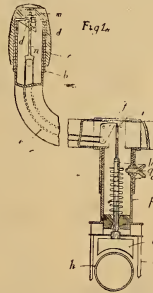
is a sectional view. A is the handle-bar upon which the sleeve b turns. Sleeve b carries the handle. The end of the handle-bar is provided with the inclined surface d, upon which the bearing pieces d, as shown inside the handle, bear. The bearing pieces are attached to the sleeve b, so that when the handle is turned by the rider the connecting piece e, which is pivoted to the lever f, will operate on the brake-block g through the medium of rod h. The rod h is dropped into plunger tube, the former being fitted with lock nuts, which can be adjusted so as to allow the handle-bar to be raised or lowered. The connecting-rod n is also made adjustable by nut m, so that all parts are adjustable. A loose cap is provided at end of handle to take off, so as to allow for adjustment. A hole is also provided at top of handle-bar to allow for manipulating the quadrant f, such hole being neatly fitted with a screwed-on cap. It will be seen the stalk
